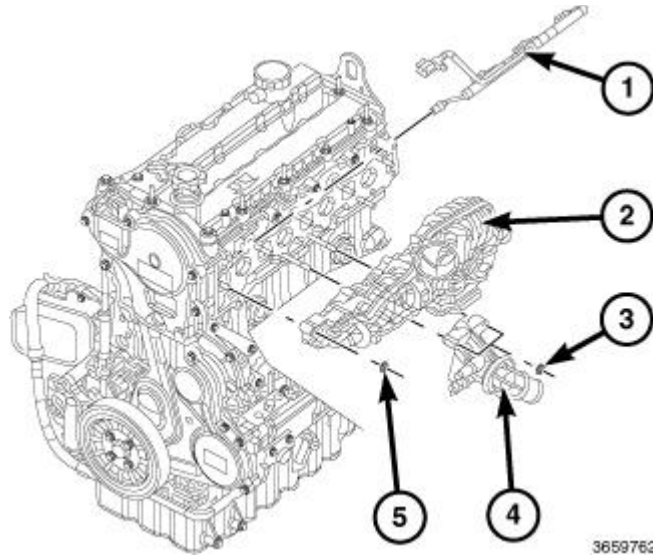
Glow Plug Harness, Intake Manifold, Thermostat Housing & Fasteners
